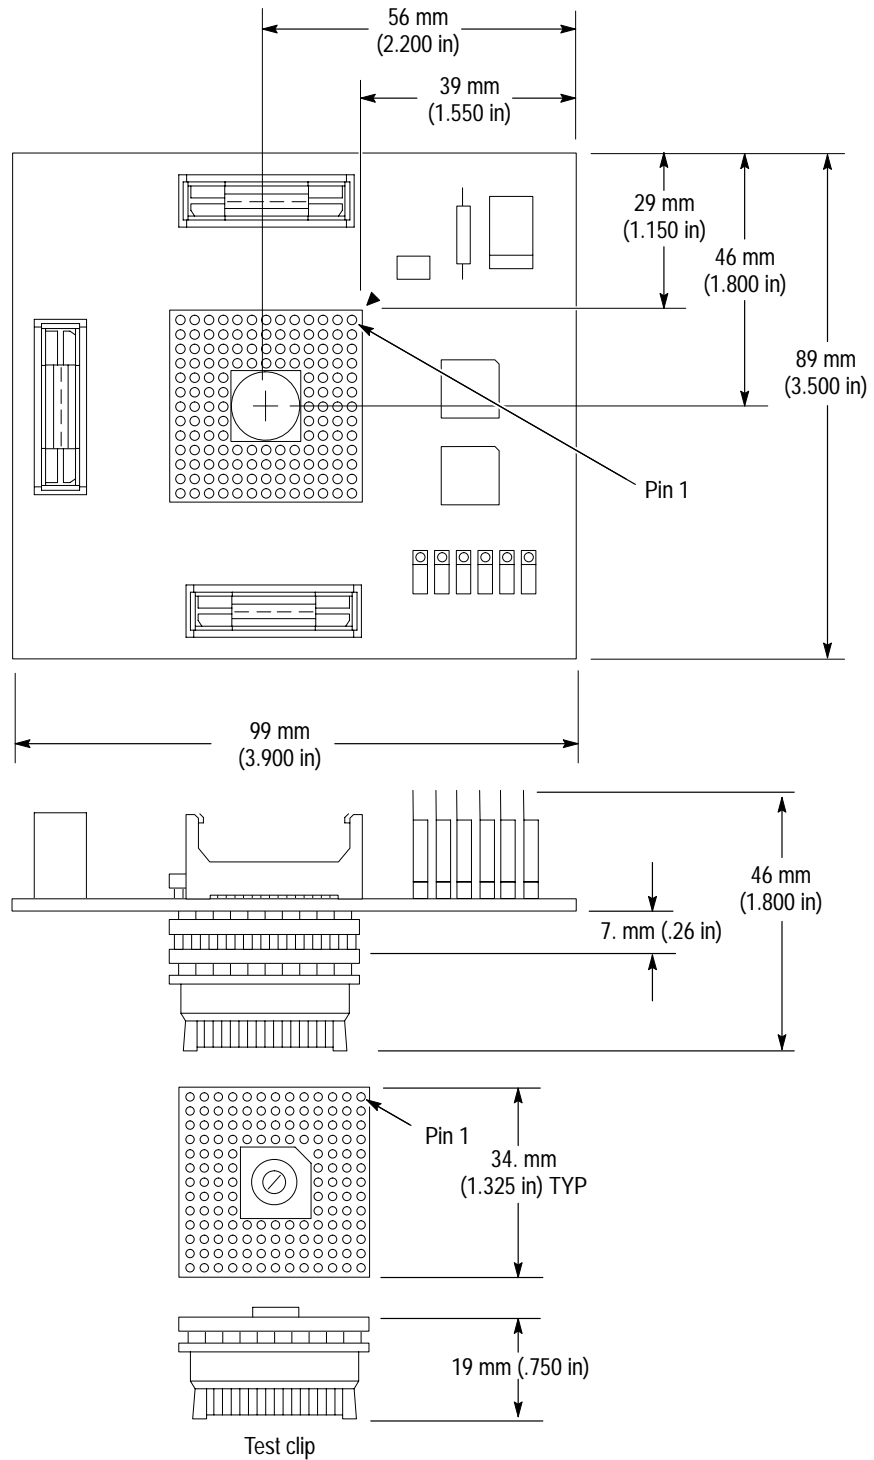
Dimensions of the probe adapter assembly and test clip
